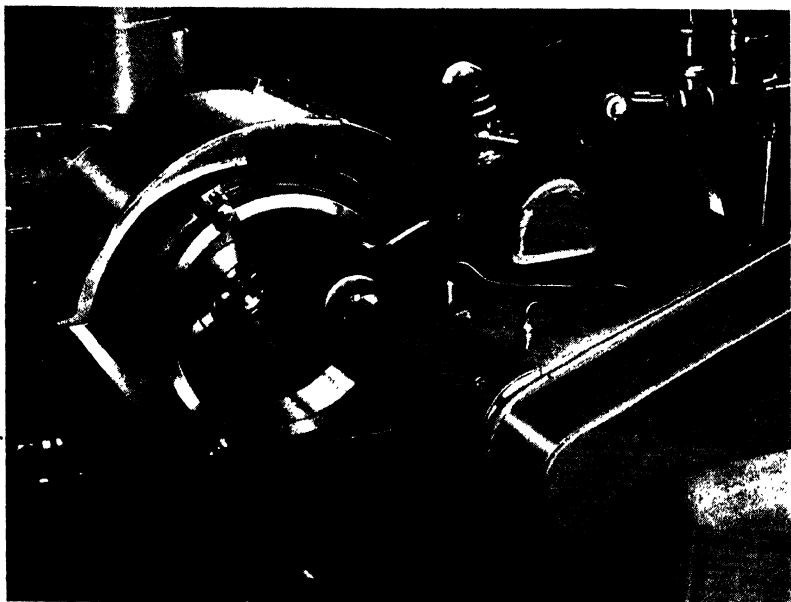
INTERNAL THREAD-GRINDING ATTACHMENT FITTED TO A
